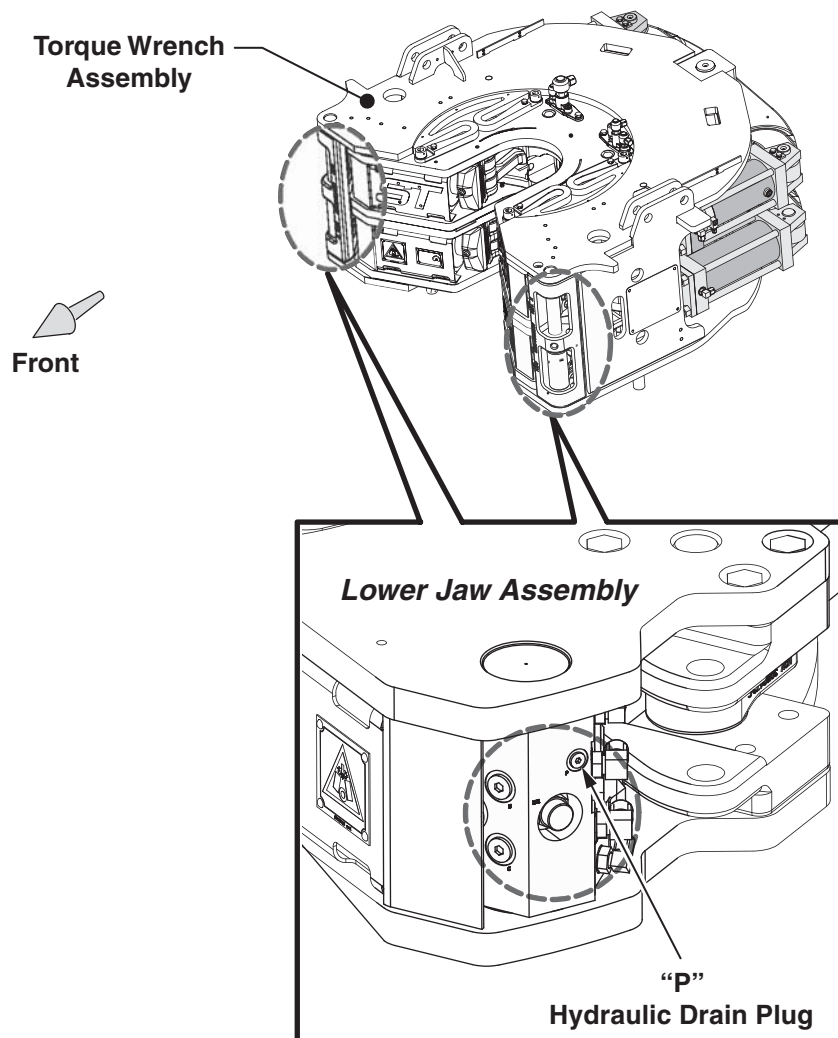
Open Torque Wrench If Hydraulic Failure Occurs
